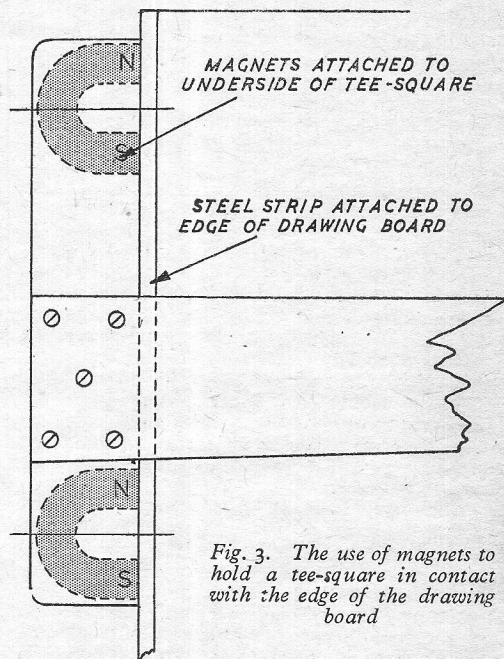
The use of magnets to hold a tee-square in contact with the edge of the drawing board
